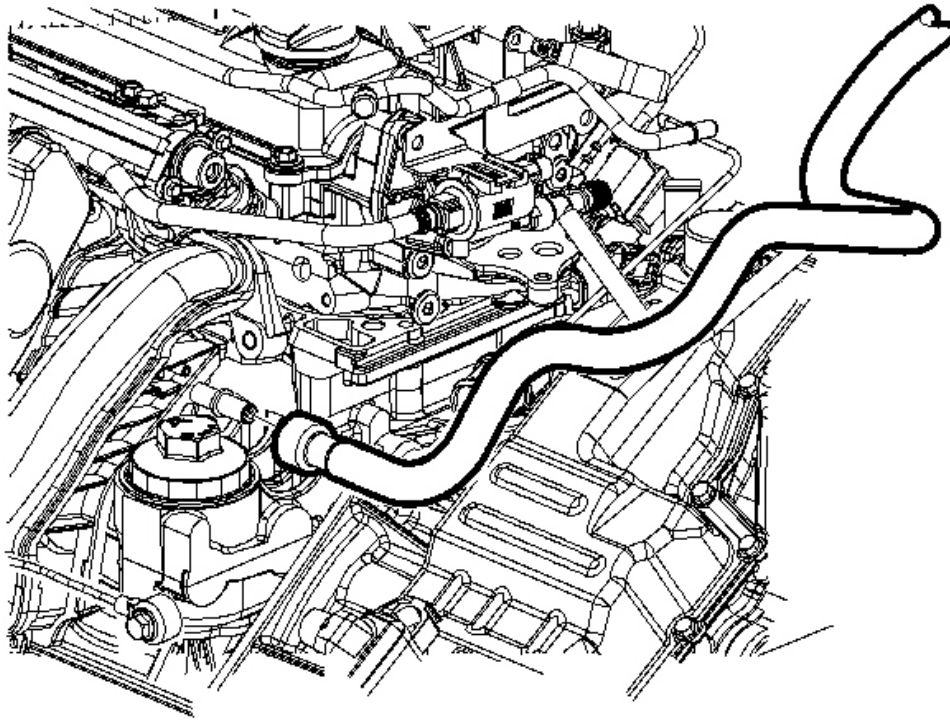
Disconnecting/Connecting Brake Booster Hose
